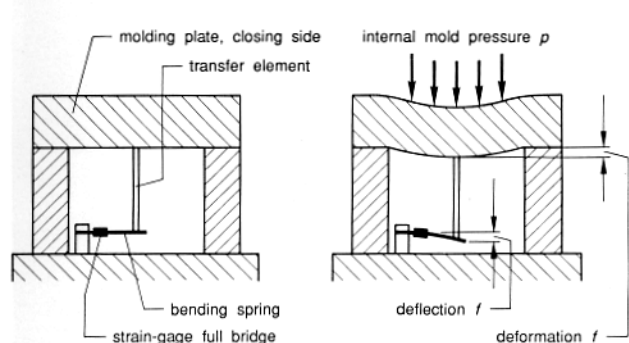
Measurement principle: Transfer of the deformation on the closing side of the molding plate to a bending spring fitted with strain gages
